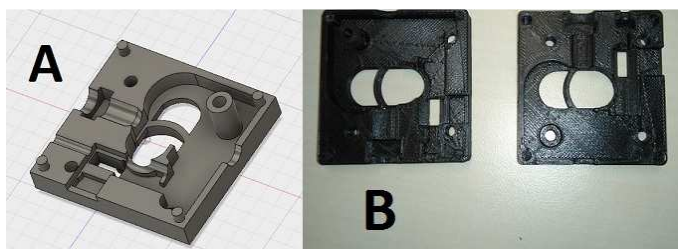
In the figure there is feeder part modelled in (A) and a printed feeder parts (B)
